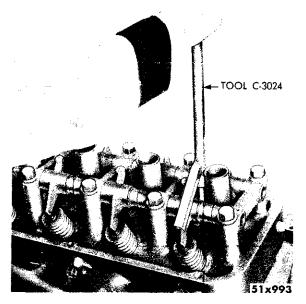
Compressing Valve Spring (FirePower) (Typical of SpitFire)
